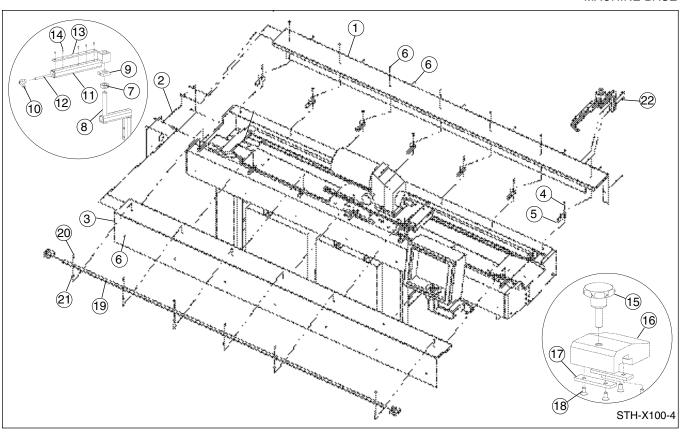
FIGURE A - TUBE HONE MACHINE BASE ASSEMBLY (4 of 8)
